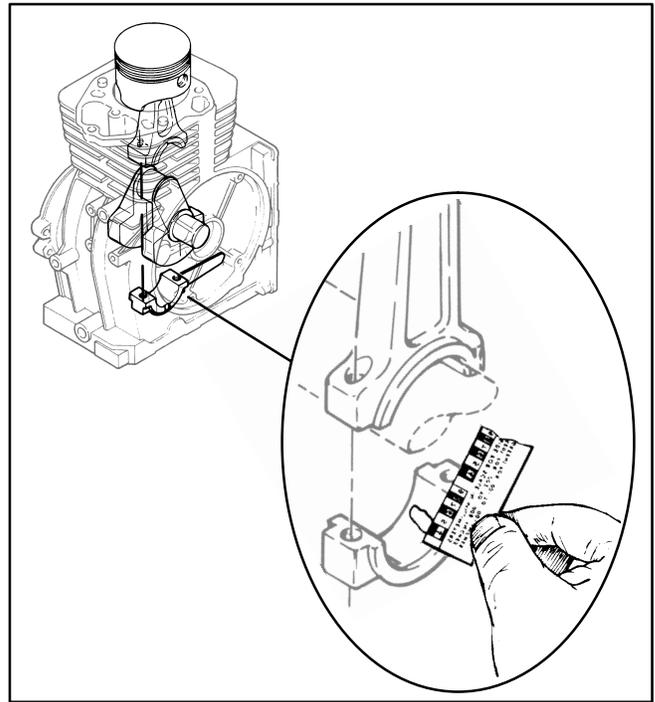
USING PLASTI-GAGE TO MEASURE CRANKPIN CLEARANCE
